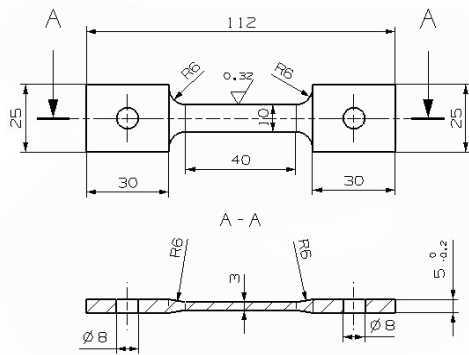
Shape and dimensions of specimens for stress-rupture test.
